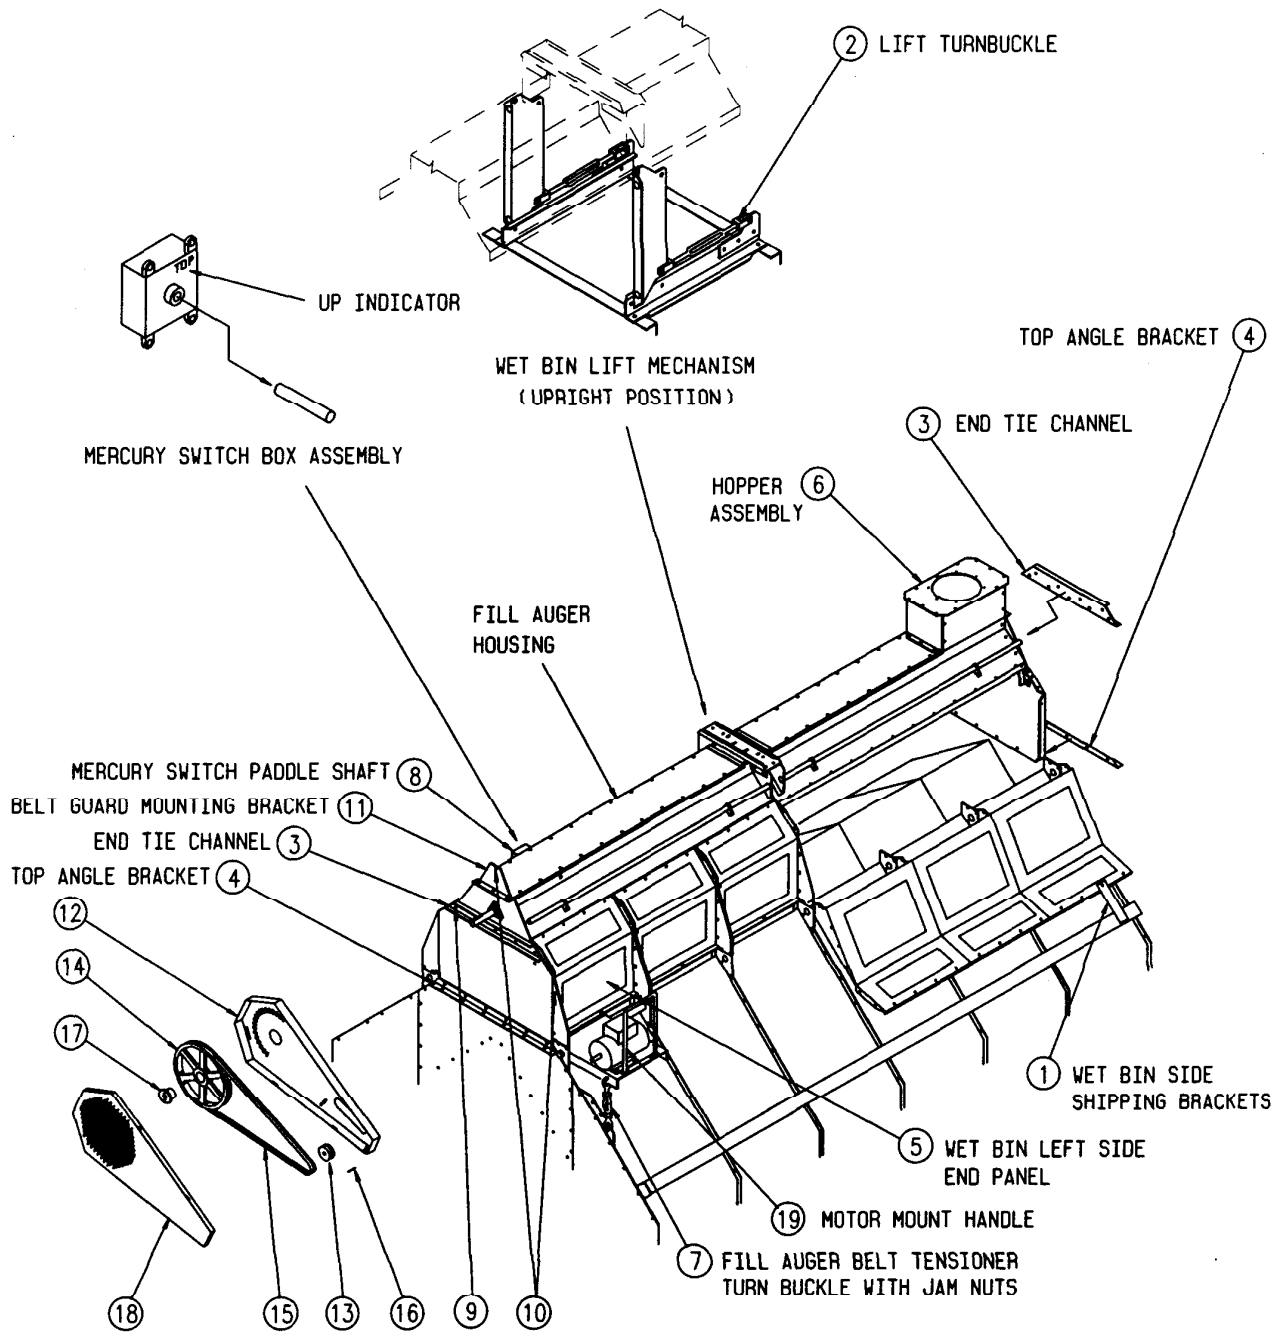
Parts breakdown of the wet bin and auger housing with belts and safety shield.
